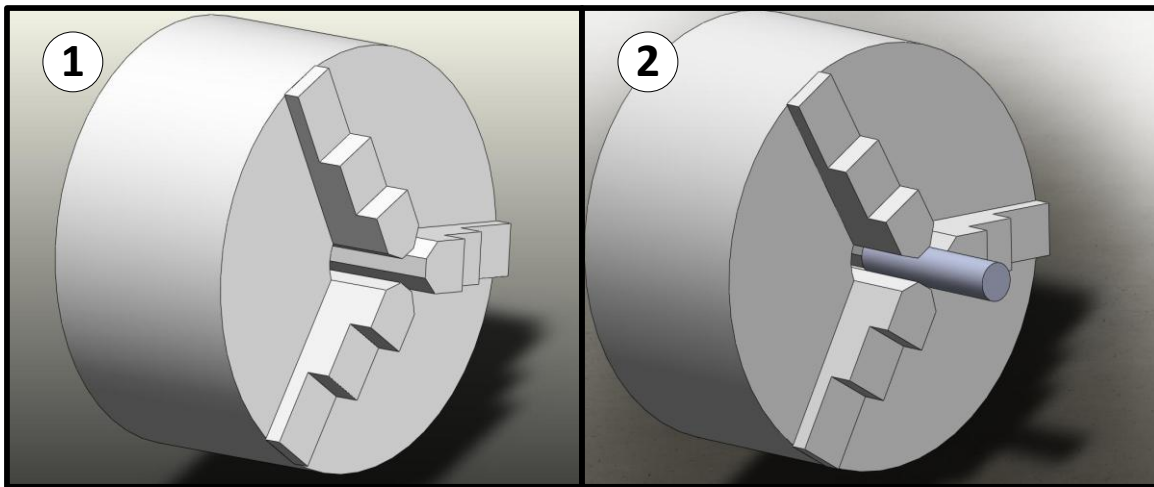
In the first step of the fabrication process, chuck a titanium rod with a diameter ≥ 7 mm.
